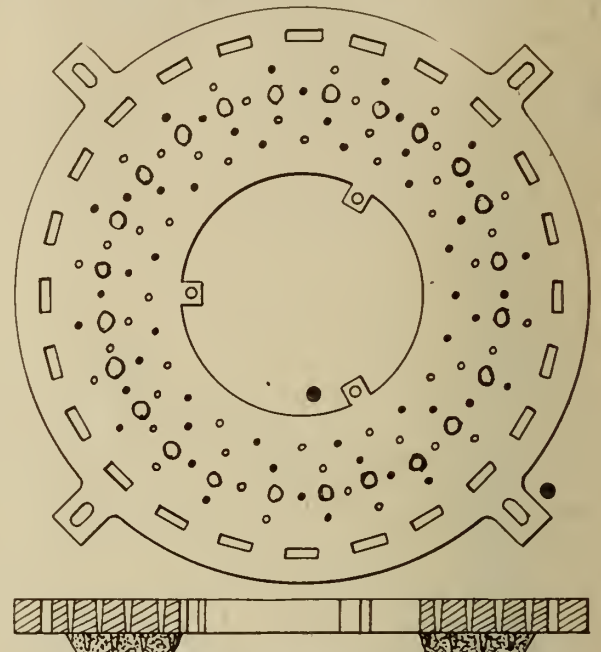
COVER PLATE, ALSO FORMING A MAJOR DUTY IN HOLDING THE MOLD.
